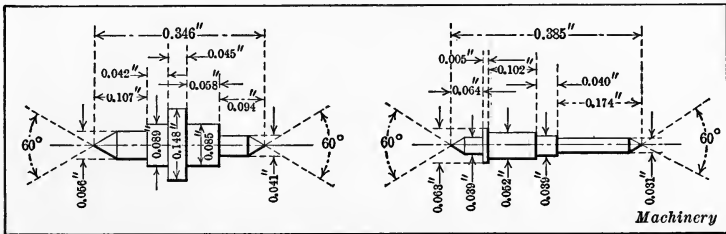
Blank for Watch Pinion made by Forming from Tool-steel Stock
